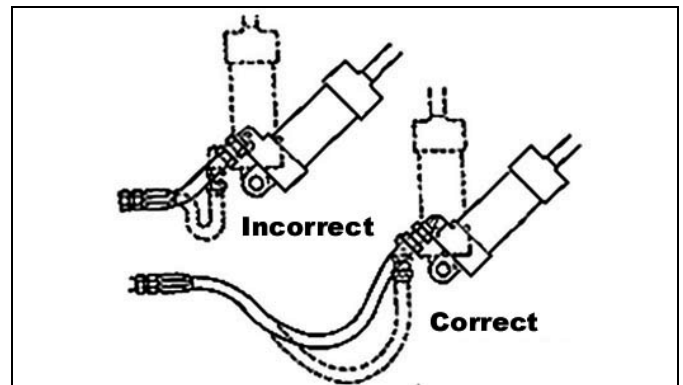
Provide adequate hose length to allow for movement of mechanisms. System design should provide sufficient hose length to prevent strain on connections at extreme extension and to prevent kinking of hose at any point throughout the entire range of motion. Either tensile strain or kinking can cause premature failure of hose/tube assemblies and connectors.
